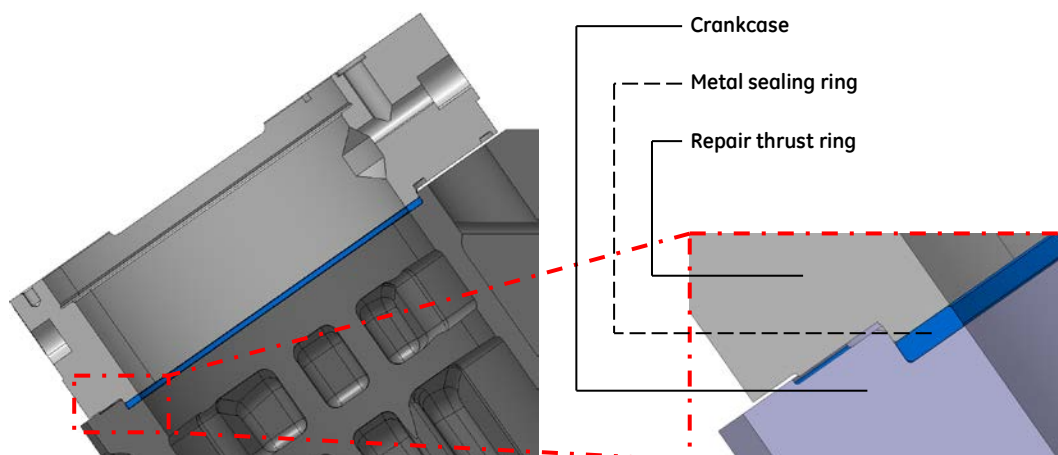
Repair thrust ring when installed – sectional view (section surfaces not shown hatched)
